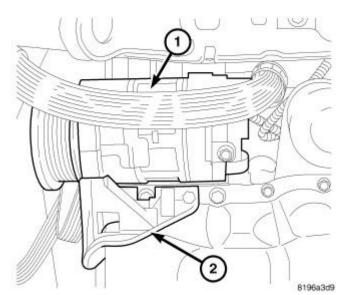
A/C Compressor & Mounting Bracket Courtesy of CHRYSLER GROUP, LLC
